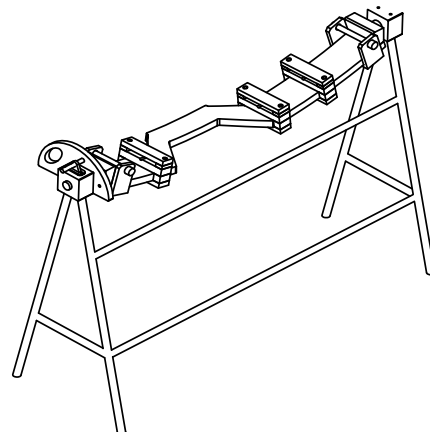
Tool for tightening and positioning spring leaves during welding
